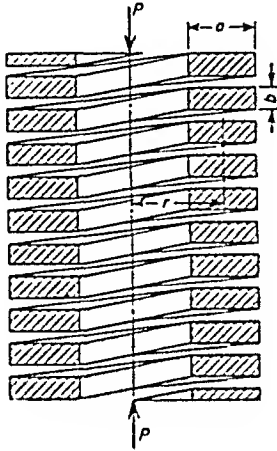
Helical spring of rectangular wire coiled flatwise.
